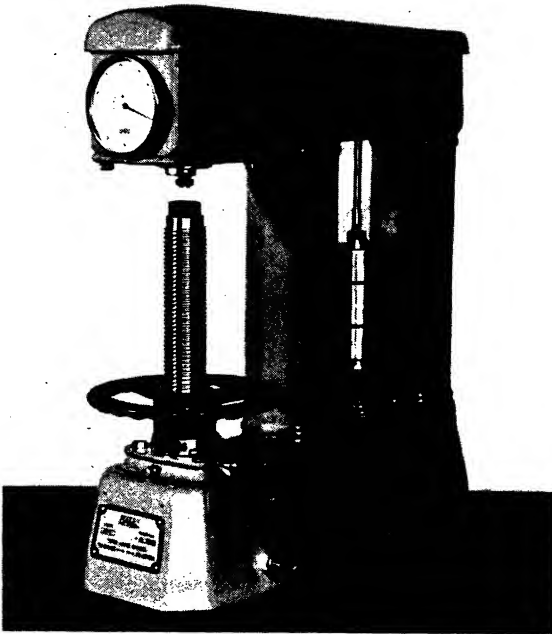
ROCKWELL HARDNESS TESTING MACHINE
